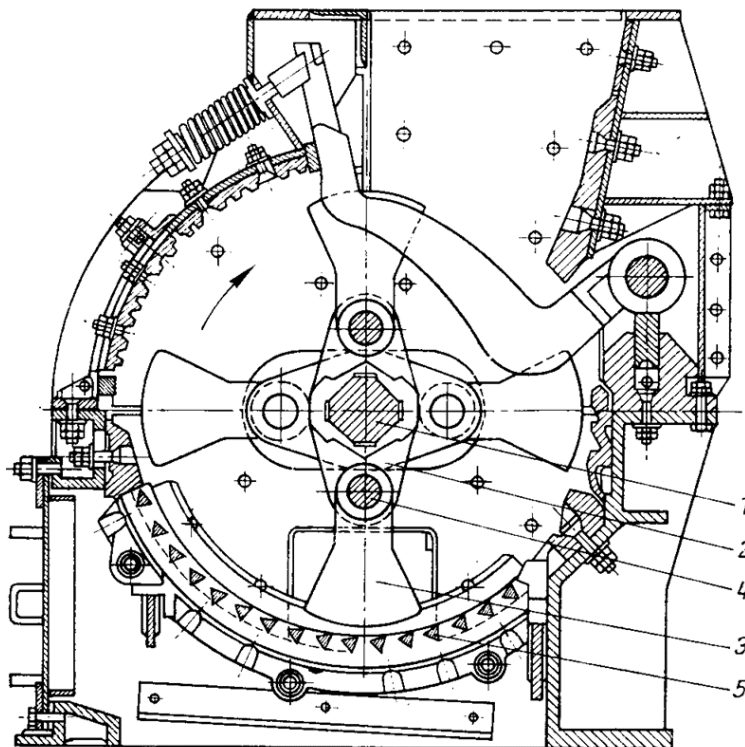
Hammer crusher with sieve and scapular inflow [2]. (1) wave; (2) motor; (3) hammer; (4) pins; (5) grid.
